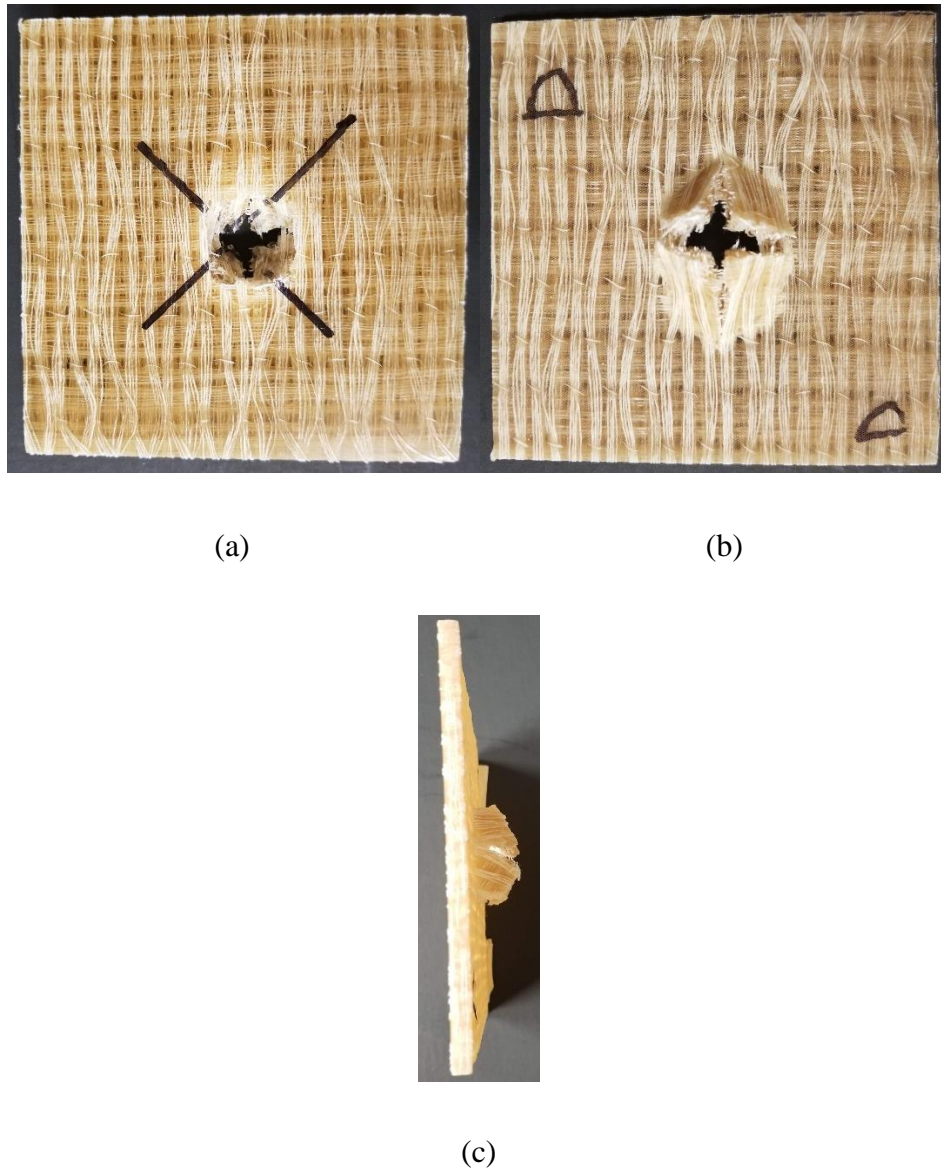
Specimen after Tup impact test (a) Front view, (b) Back view, and (c) Side view
